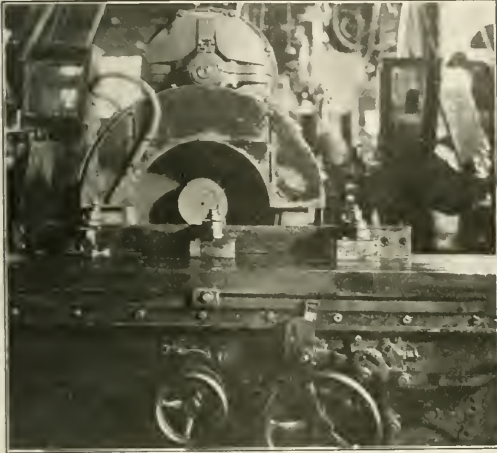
Horizontal Surface Grinder Truing Worn Guide
